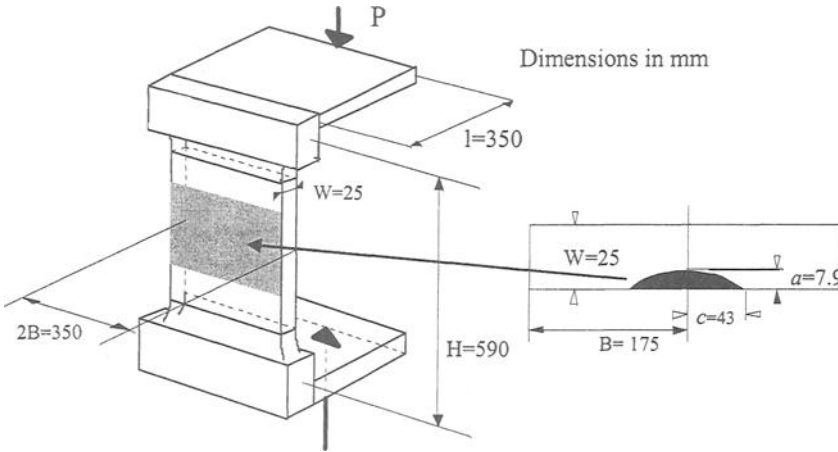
CEA's plate specimen dimensions in (mm) showing the loading points. Initial crack depth  $a_0=7.9$  mm, surface crack length  $2c=86$  mm, plate thickness=20 mm, width =175 mm and slow dwell (1 cycle/hour) bending moment of  $\pm 14.0$  KNm.
